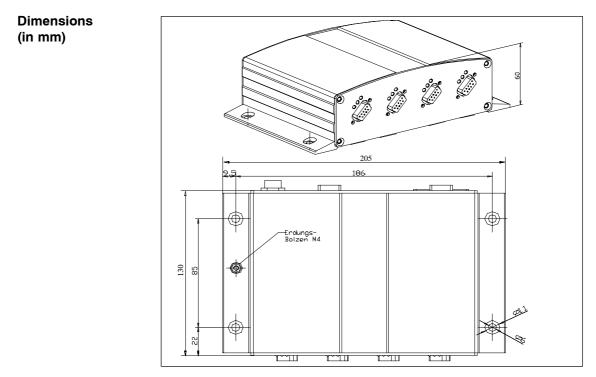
Dimensioned drawing of the ASM 724/754 with mounting holes
